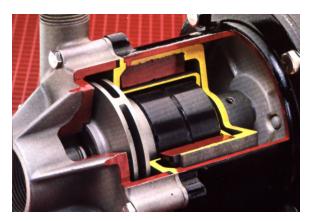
Torque Coupled Pump The inside magnet set is connected to the pump housing; the outside drive set is fastened to the drive shaft of the motor. A can seal separates the magnets. Photo courtesy of March
